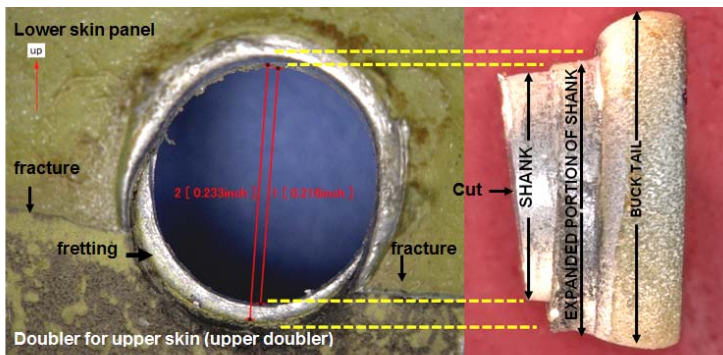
Rivet hole when viewed from inner face of the skin panel (left side) and side view of corresponding rivet that was removed from the rivet hole (right side) [NSTB, 2013].
